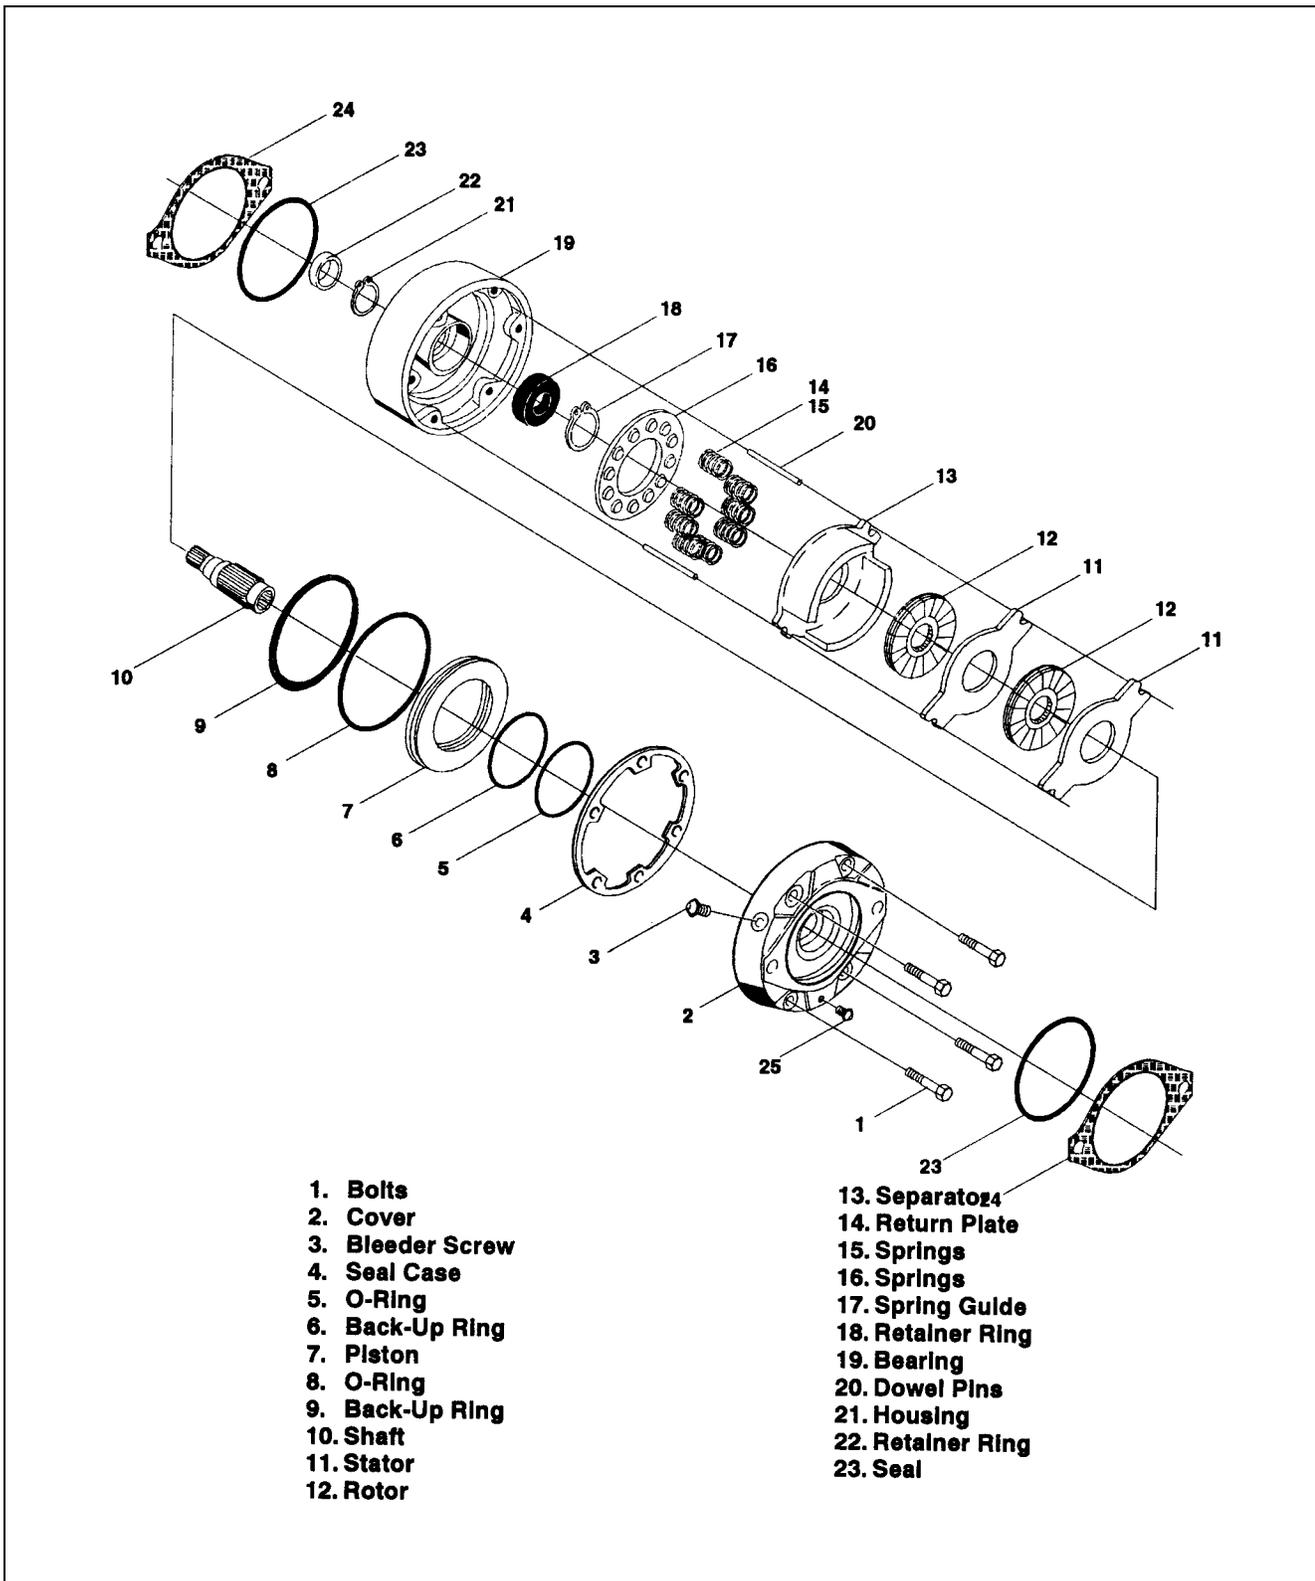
Drive Brake, Mico. (Machines Built From May 1992 To Machine S/N 33476)
